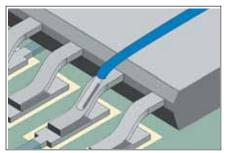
Not Recommended Wire soldered to component lead, wire over component.
